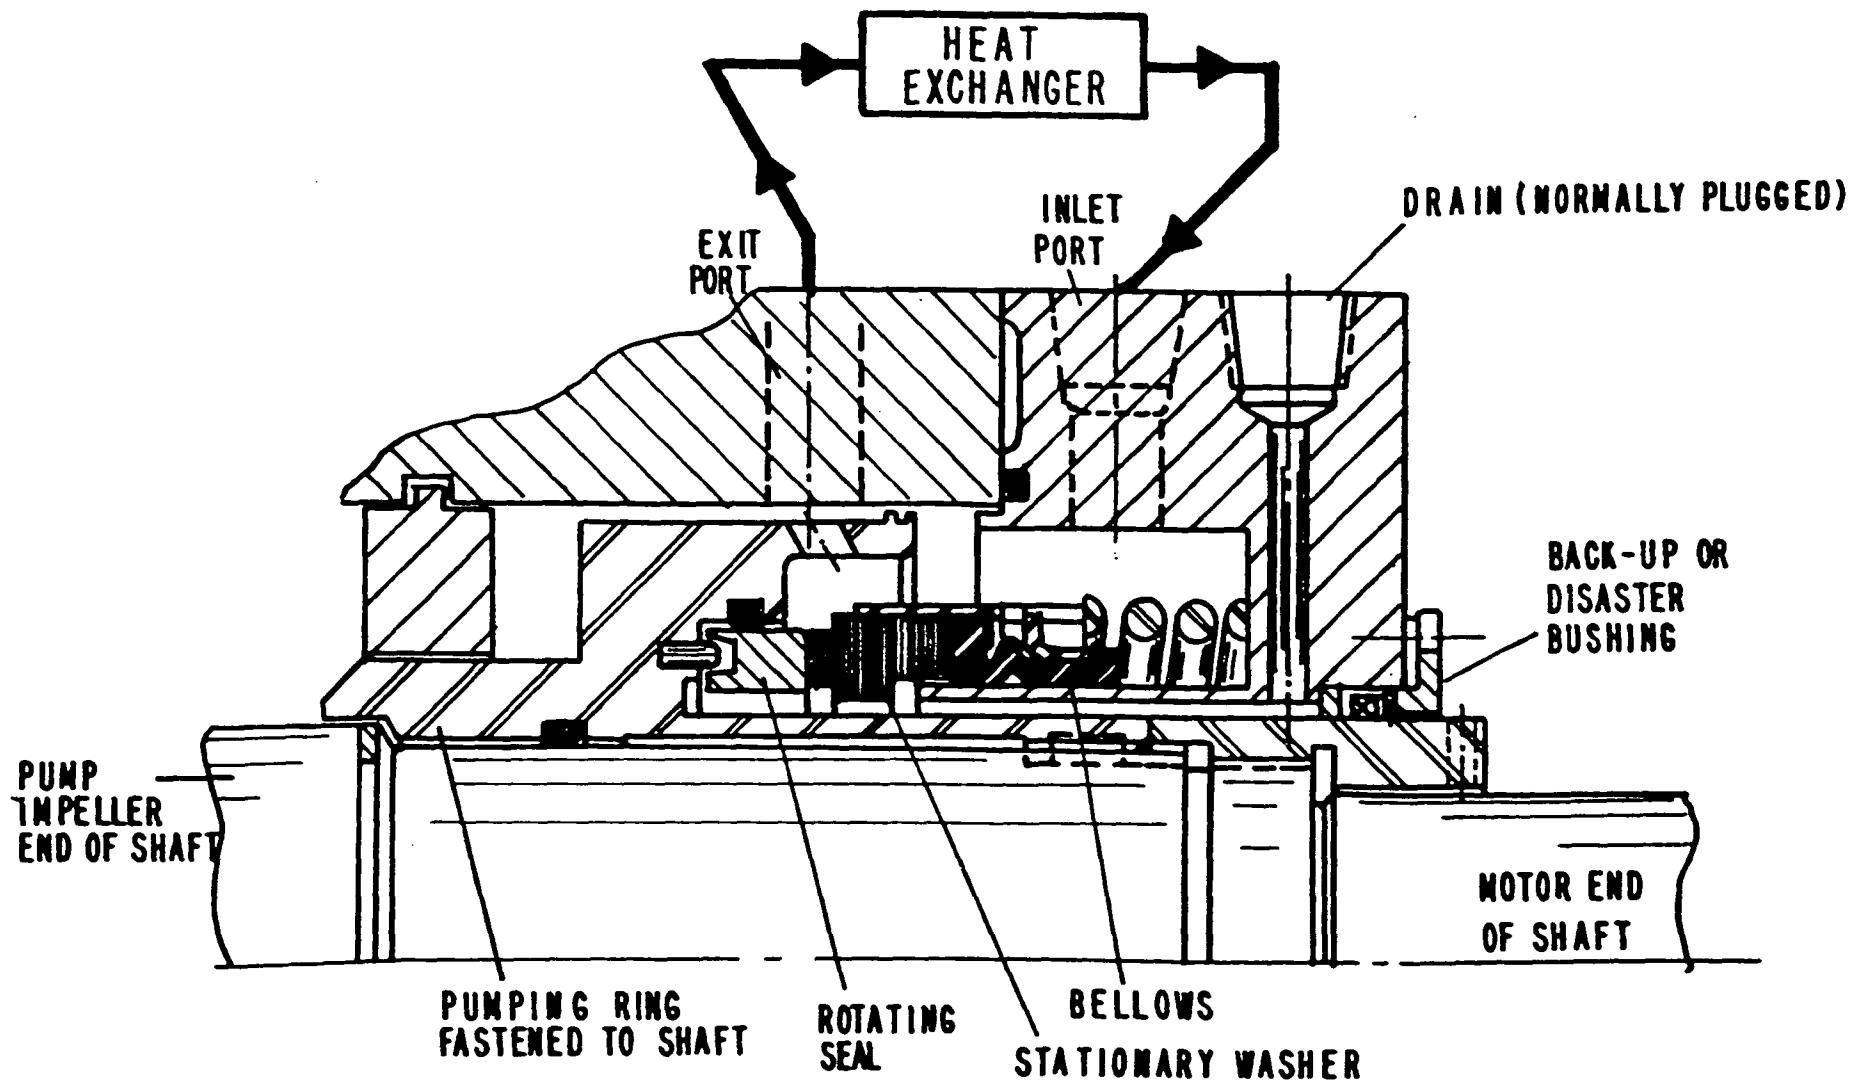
CROSS SECTION OF MERIDIONAL SHAFT SEAL USING PUMPING RING AND CLOSED LOOP COOLING
